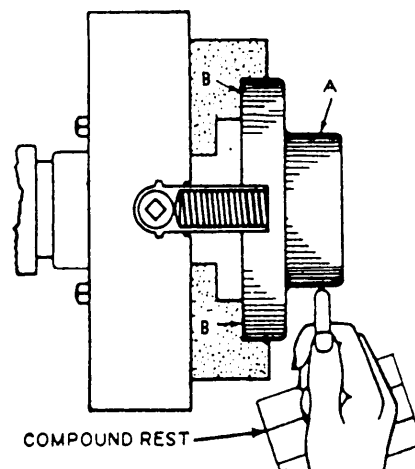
Work mounted in a four-jaw independent chuck.
